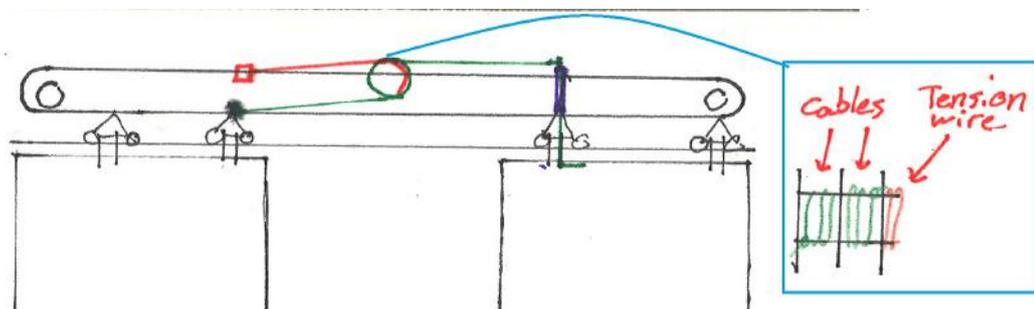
Concept 4 - Tension wire cable winder. Similar to concept 5.2 and concept 5.3 but the cable winder is driven by a tension wire clamped to the drive belt instead of a spring or cog wheel.
